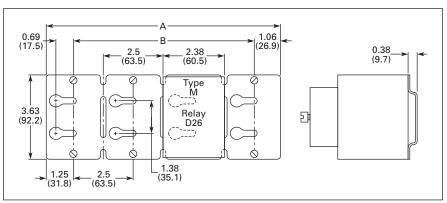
Approximate Mounting Channel Dimensions in Inches (mm)
